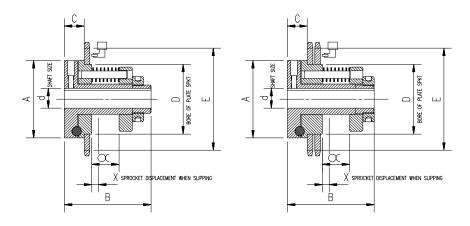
Mayfran safety clutch section view. See table below for dimensions.
